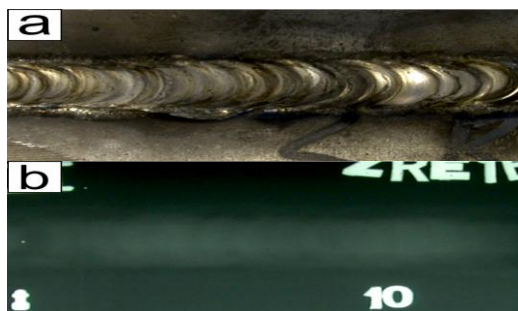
Results of visual inspections of welded joint marked as Z3:
